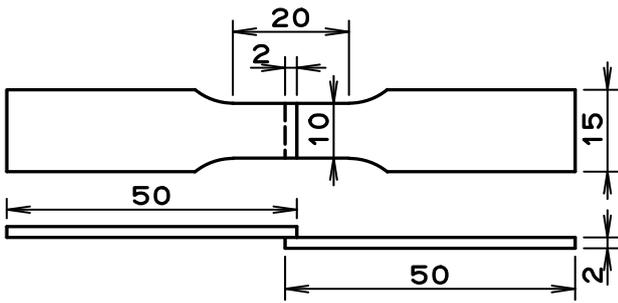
Tensile shear strength test specimen (JIS Z 3192) and these dimensions.
